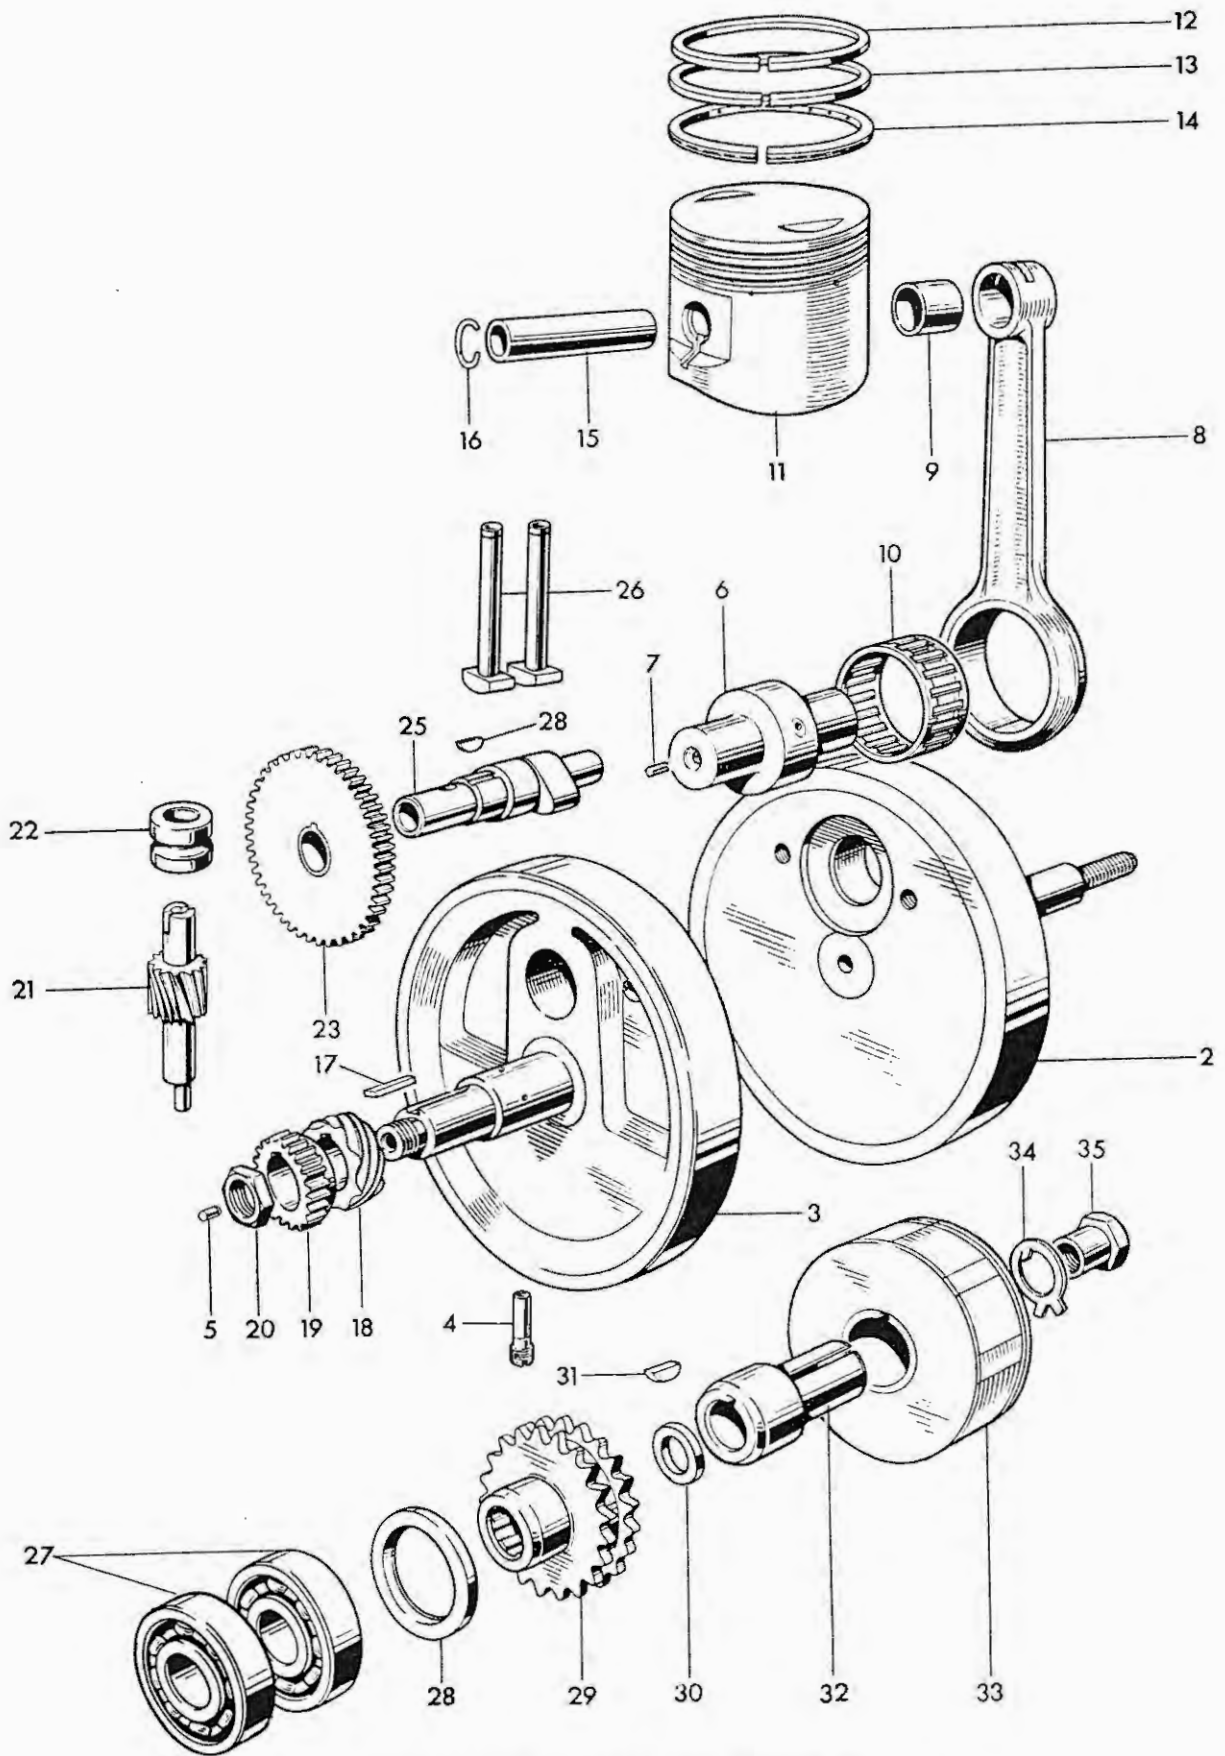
CRANKSHAFT, PISTON AND TIMING GEARS
